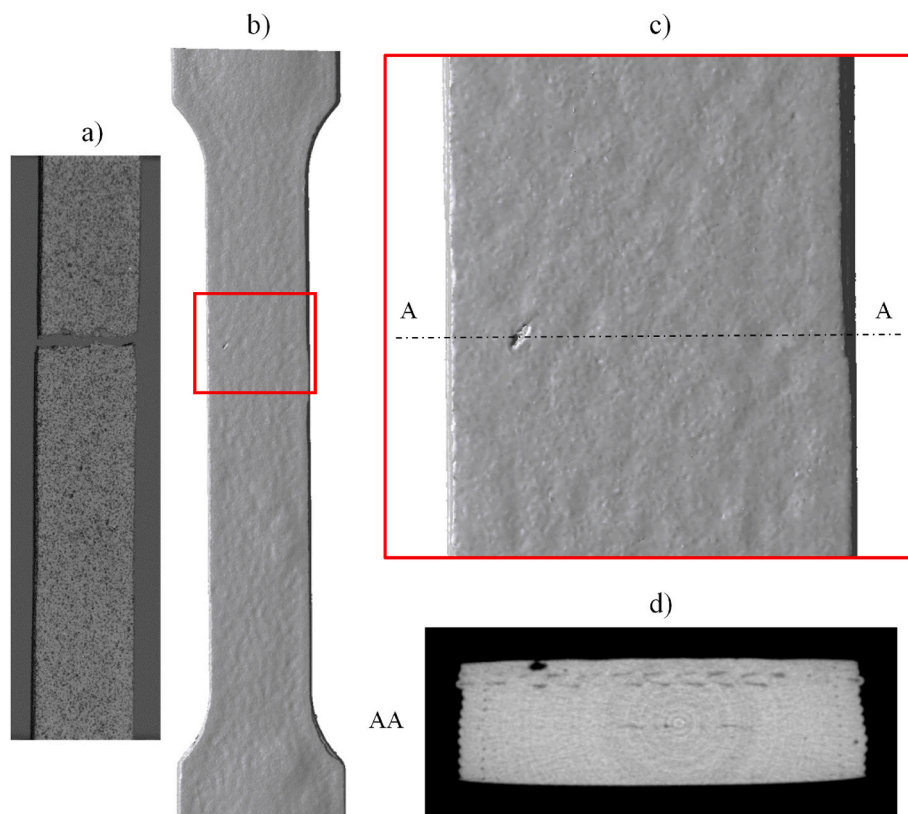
a) DIC photo after the moment of test failure showing spray painted specimen 3 and fracture location; b) Surface reconstruction of the specimen 3 showing surface defect in the zone highlighted in red (fracture location); c) close up view of the surface defect that led to test failure; d) μ XCT section cut (AA) view displayed in c) showing the presence of internal porosity near the surface defect location. (For interpretation of the references to colour in this figure legend, the reader is referred to the Web version of this article.)
